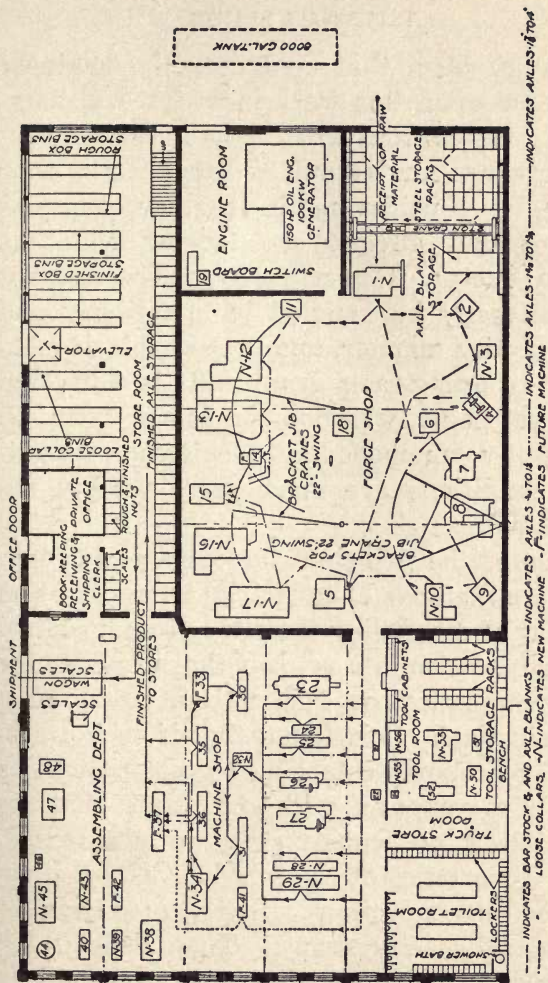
DETAIL ROUTING DIAGRAM: MACHINE-TOOL EQUIPMENT AND PATHS OF PARTS IN A WAGON- AND CARRIAGE-AXLE PLANT. (See note, page 130.)
